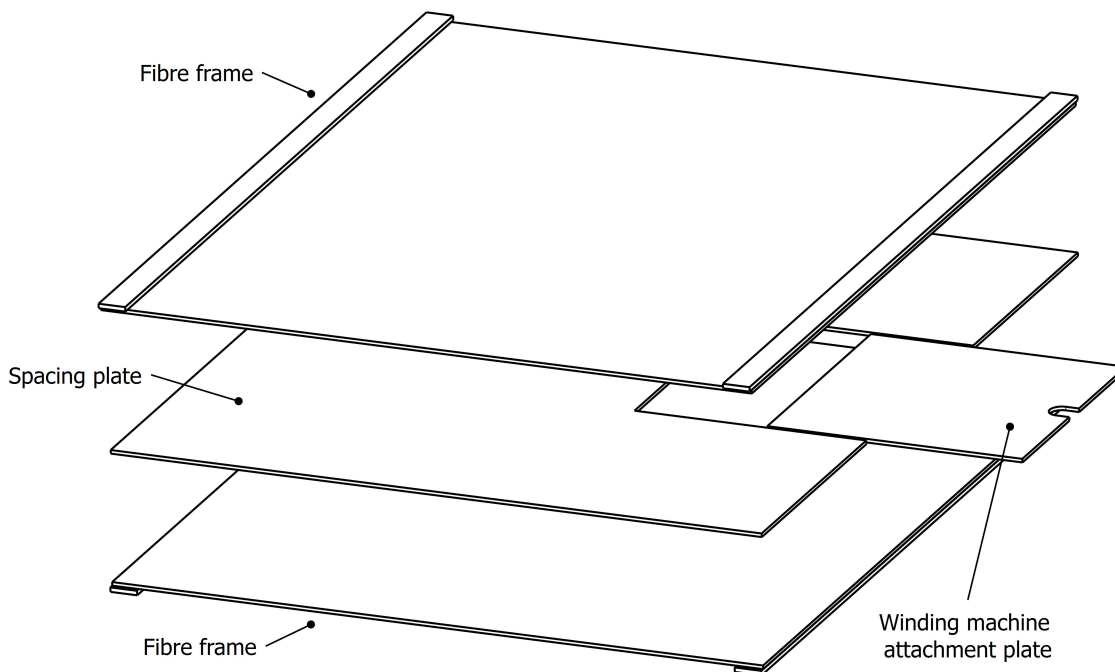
Schematic exploded view of continuous fibre frame assembly for filament winding process.
